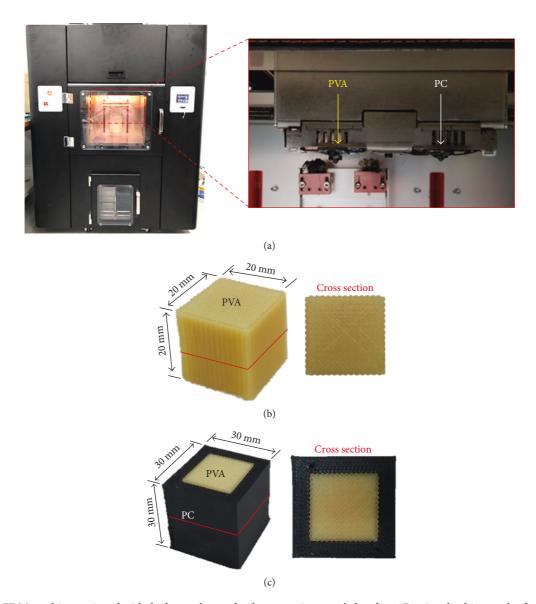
(a) FDM machine equipped with dual extruders and a thermostatic control chamber. 3D printed cubic samples for the solubility test of (b) external- and (c) internal-type supports.
